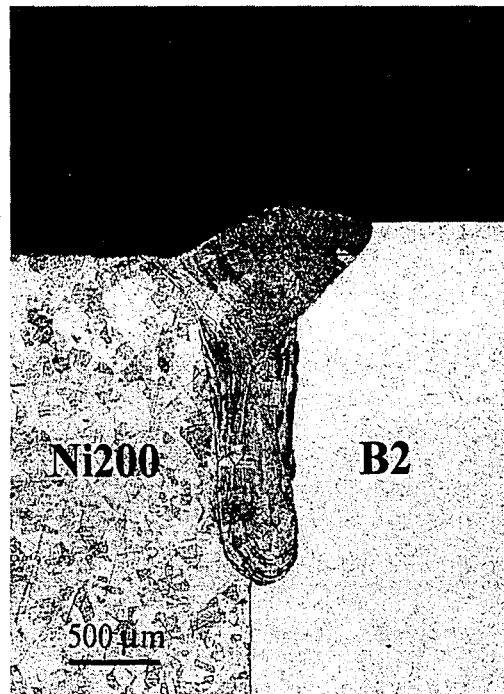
B) Dissimilar metal welds showing dimensional changes with travel speed.
